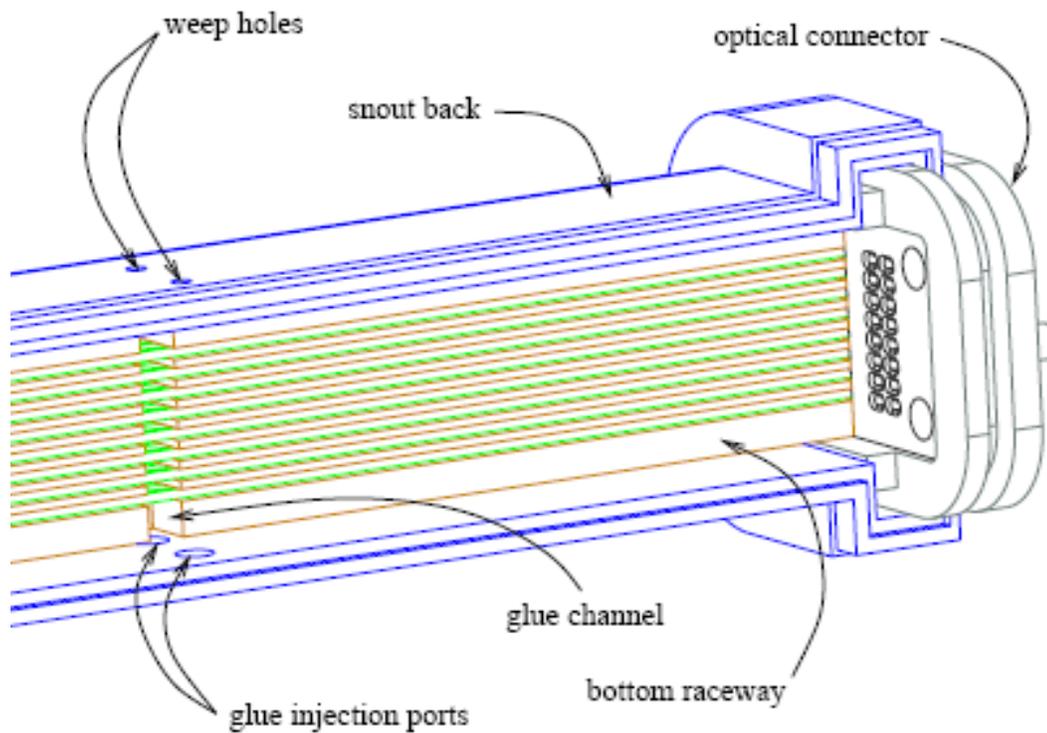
Cutaway of the manifold snout showing the fiber routing to the optical connector and the vapor seal.
